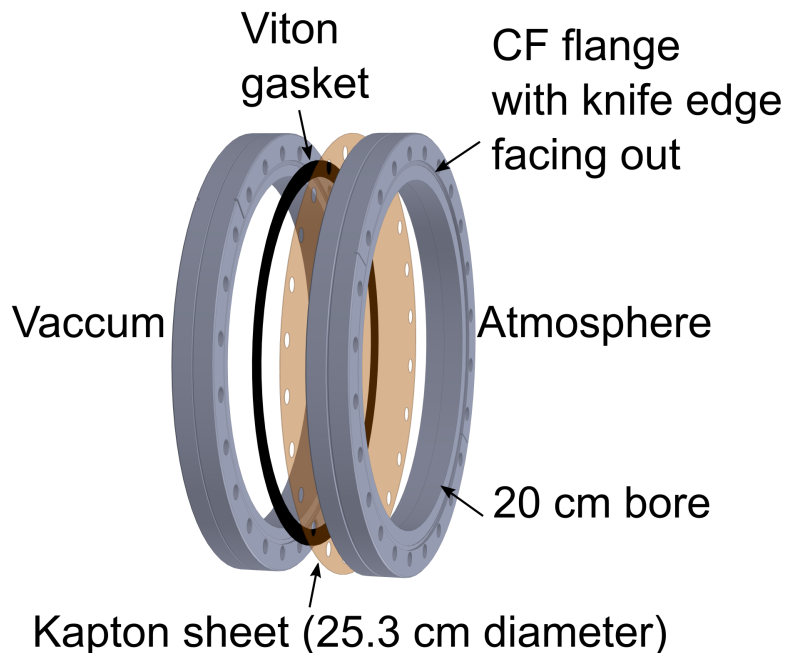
Drawing of the Kapton window assembly. The Kapton sheet is placed between a Viton gasket and a ConFlat flange. The knife edge of the flange is facing away from the Kapton sheet so that the sheet is not damaged by the knife edge.
